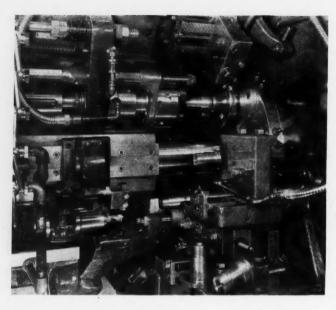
Shown Hers are the Tools Employed in the Sixth Position, Fig. 7, Which can be Seen in the Lower Part of the Picture, the Fifth Poistton Tools in the Center, and the Fourth Position Tools in the Upper Portion in the Upper Portion
